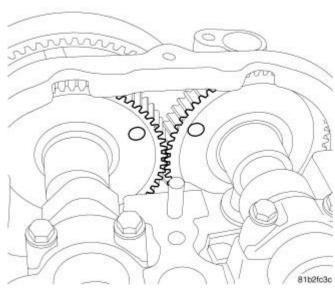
Mark Camshaft Tone Wheel Courtesy of CHRYSLER LLC
